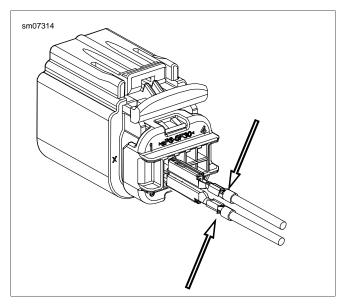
Socket Terminal Orientation: Crimp Open Side
